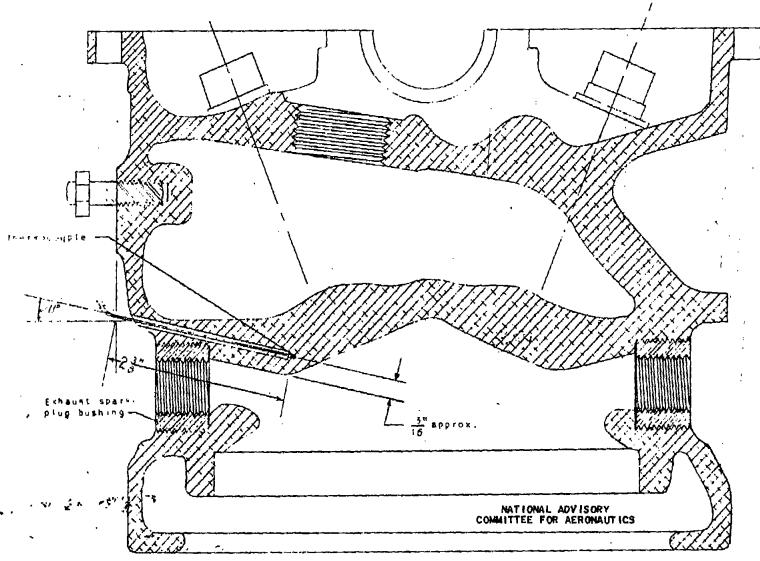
Section through cylinder head of a V-type, liquid-cooled aircraft engine showing location of cylinder-head thermocouple.
